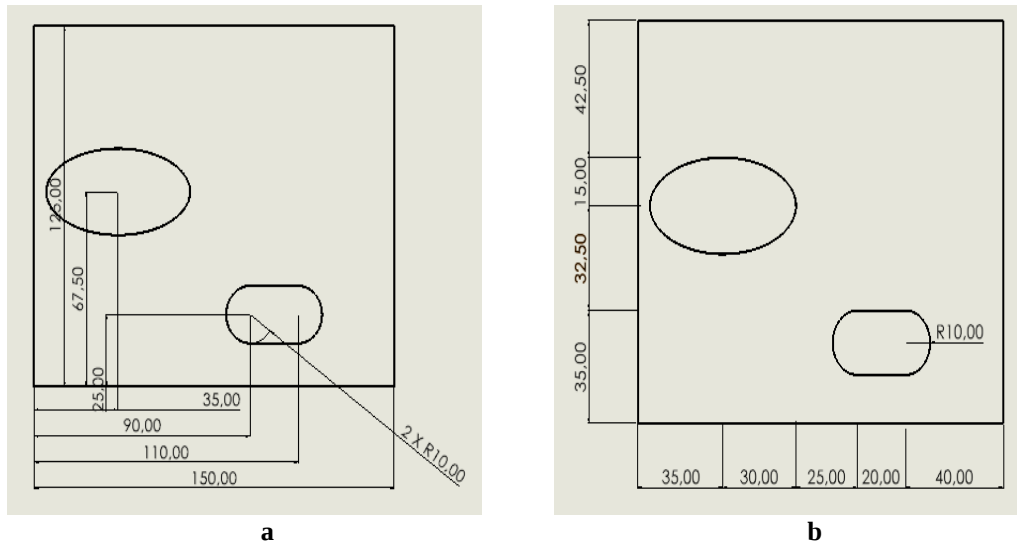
(a) Dimensions are placed by SolidWorks™. (b) Dimensions are placed by our software
